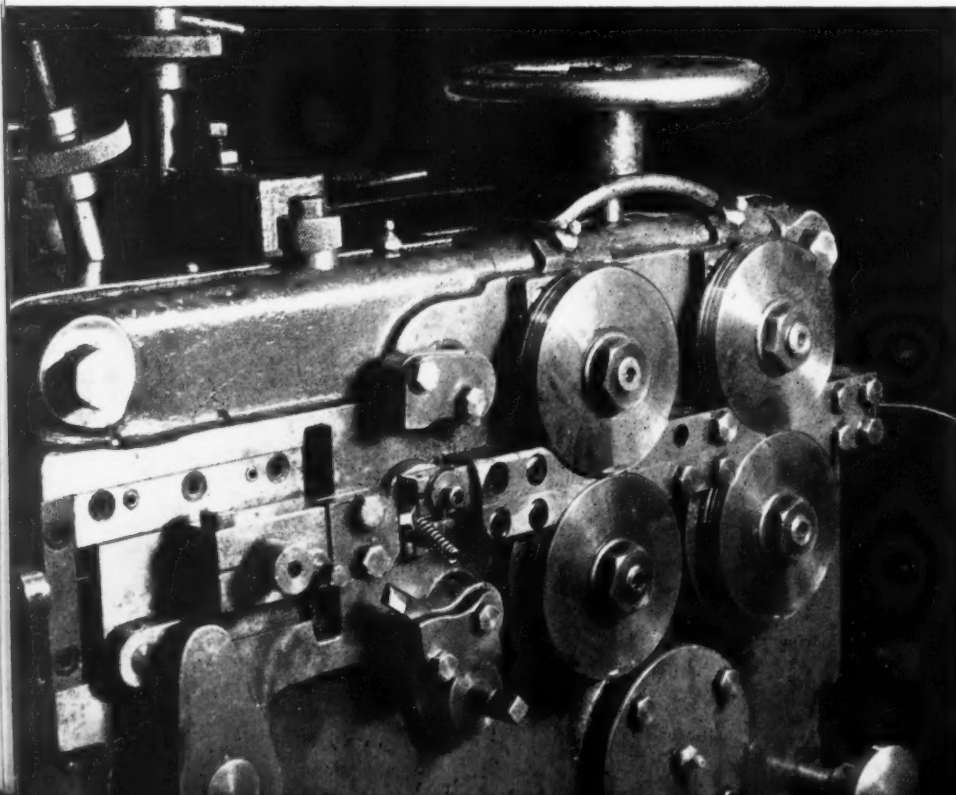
The Mainspring, which Actuates the Hammer when Trigger is Pulled, is Produced on the Automatic Spring-making Machine Illustrated. The Finished Spring Must be Held within Close Limits for Weight, Length, Diameter, and Deflection for Given Load
